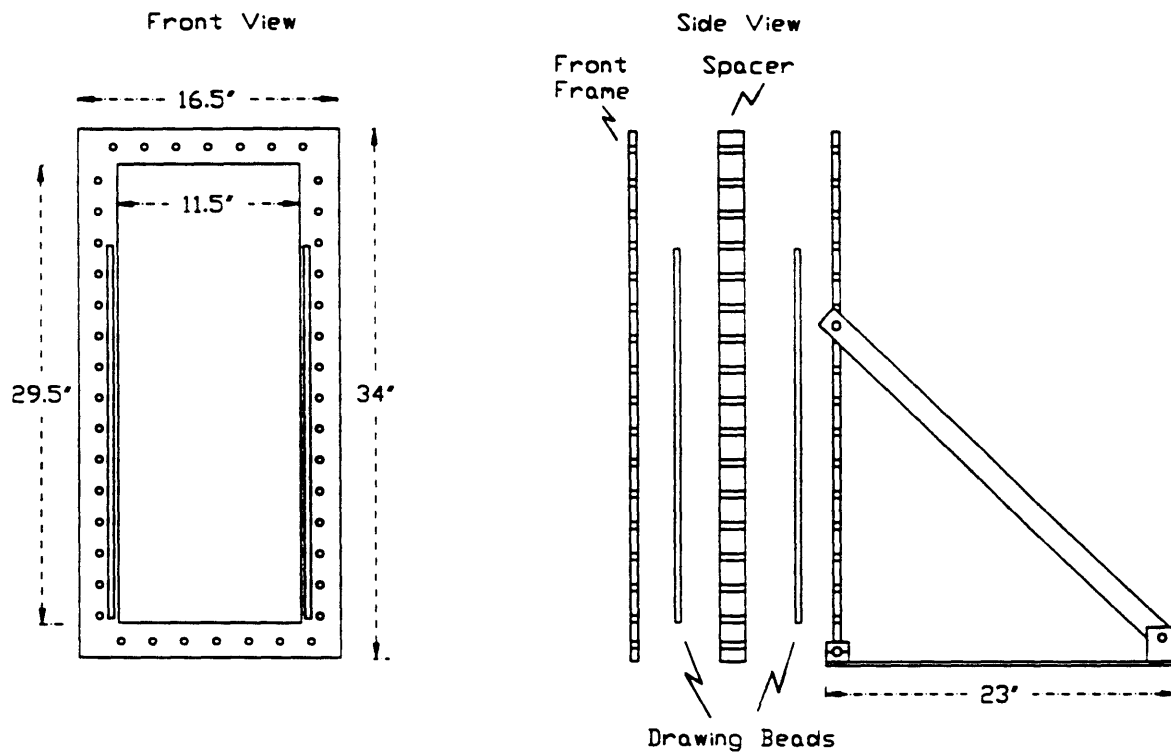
Specimen Test Frame (From Bracco (1994))
